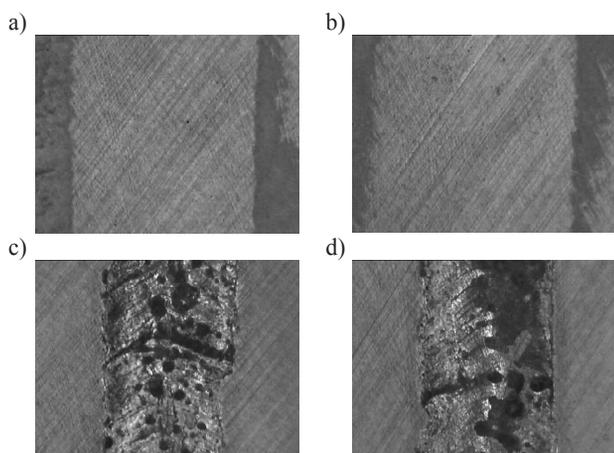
Shape of the laser tray of the 32CrMoV12-28 steel remelted with BN powder, laser power a) 1.2 kW, b) 1.6 kW, c) 2.0 kW, d) 2.3 kW, mag. 10x
